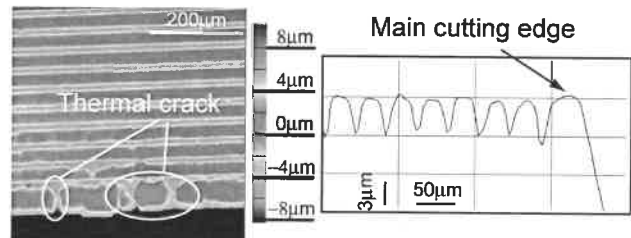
Rake face of the conventional TiAlN coated cutting tool after cutting for 600 m
